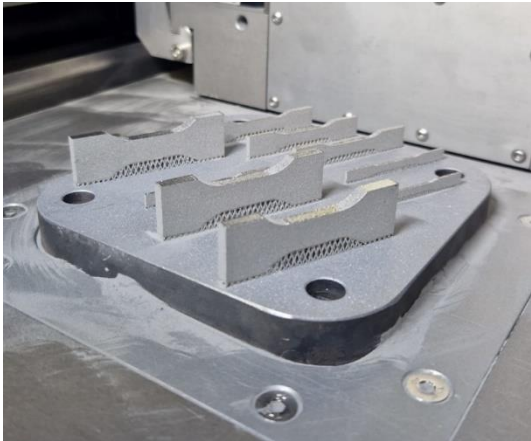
Example view of horizontally oriented specimens on the build plate of the SLM 125HL machine.
